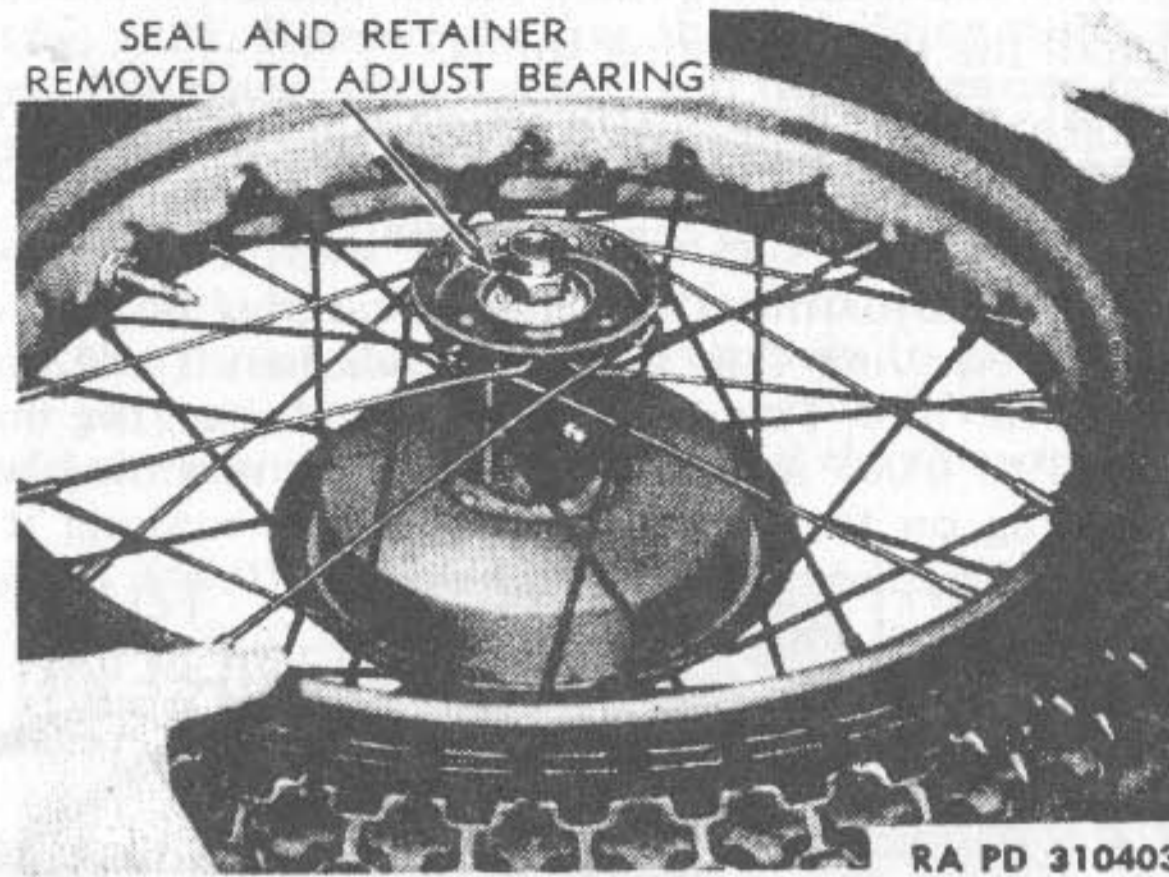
Cone, Lock and Nut in Position to Adjust Front Wheel Bearing Play
